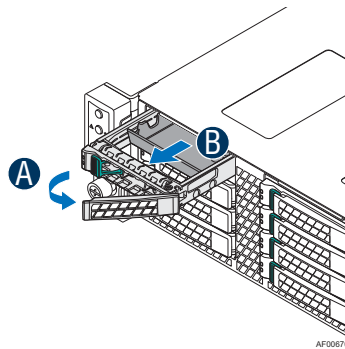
2.5" HDD or SSD Assembly – Removing the Carrier
